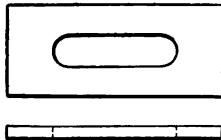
A Piece of Work for which the Punch Should be Provided with Shear.
